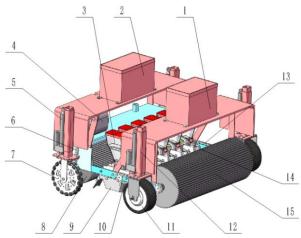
Small electric remote control vegetable seeder machine structure diagram
